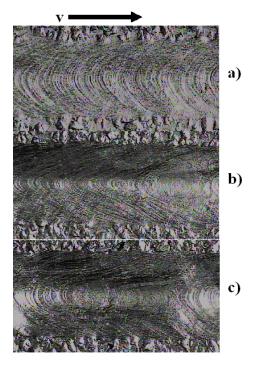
Weld surface for welds made at laser power of) 1.5kW, b) 2.5kW, c) 3kW
